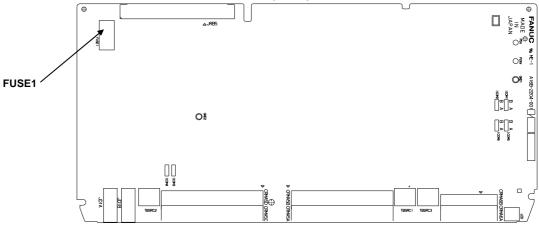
(e) Fuse on the Process I/O board JA,JB
